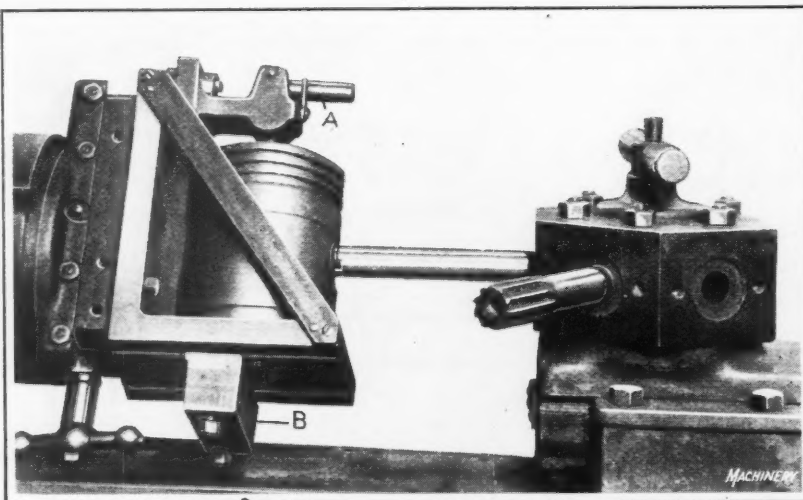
Piston Fixture with Cross-slide Adjustment Feature
